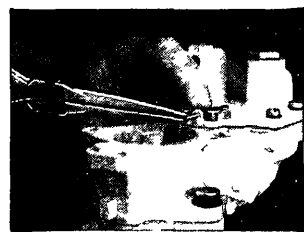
Install anti-percolator cap and rocker arm and spring. Make certain that leather is in good condition and that pin is not worn
